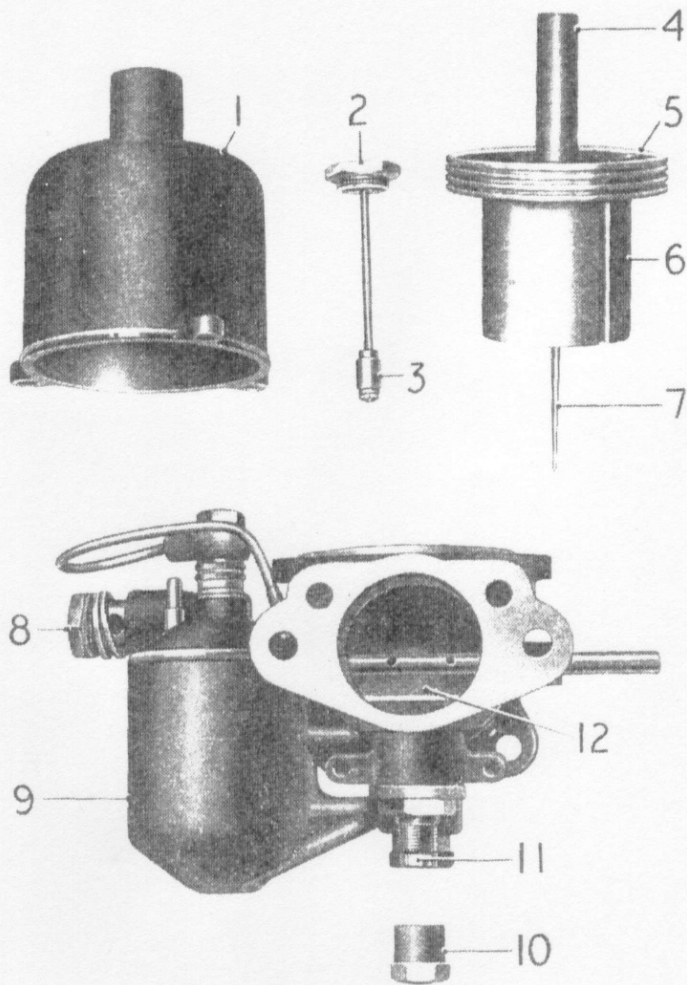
CARBURETTER - EXPLODED VIEW.
